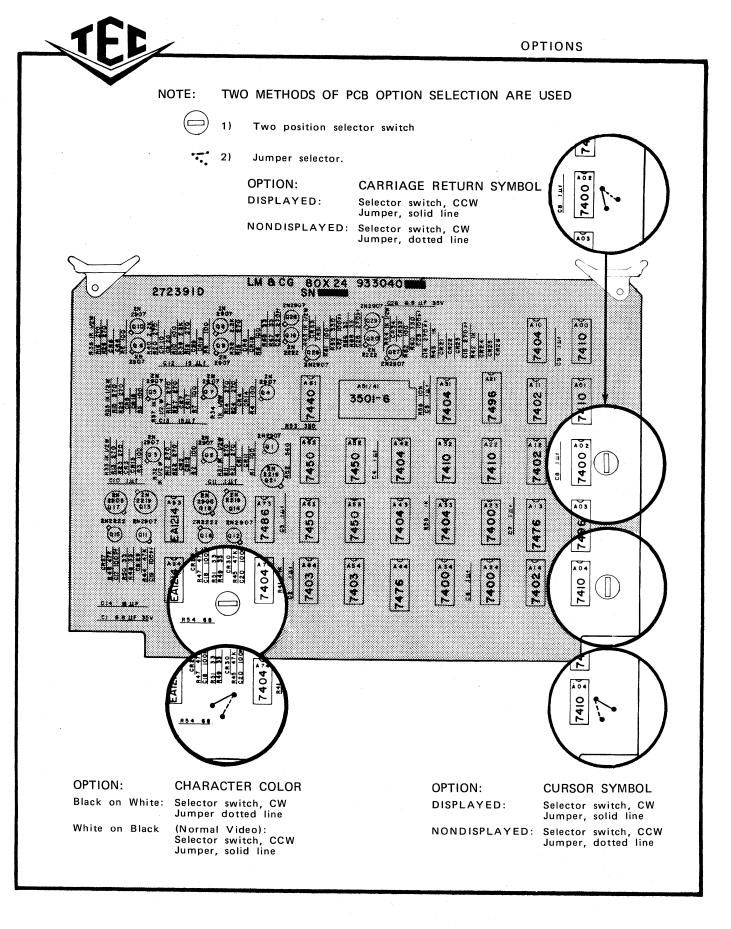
SWITCH/JUMPER OPTIONS ON MODEL 455 LINE MEMORY & CHARACTER GENERATOR PCB
